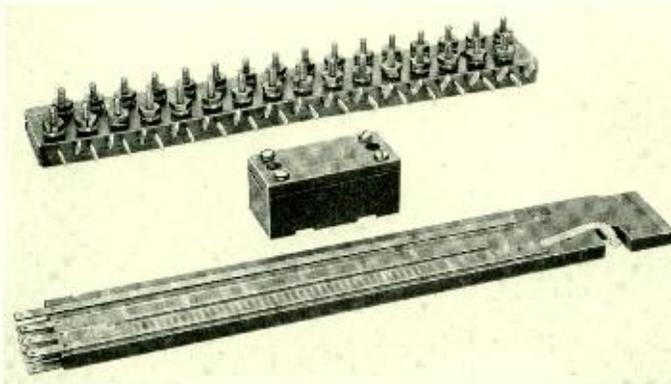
Typical shellac composition parts with metal inserts embedded during the molding operation
